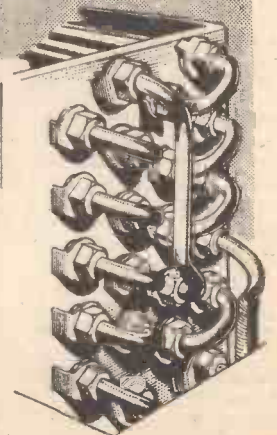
Multi jet burners of Serpollet type. A.—Oil entry to vaporiser; B.—Perforated iron supplying air to boiler; C.—Air scoop; D.—Air holes; E.—Sides of burner case; F.—Door of burner box.
